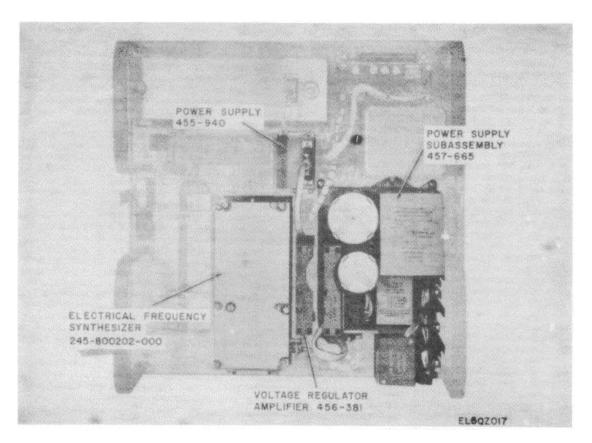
Receiver Test Facility Chassis, Rear View.
